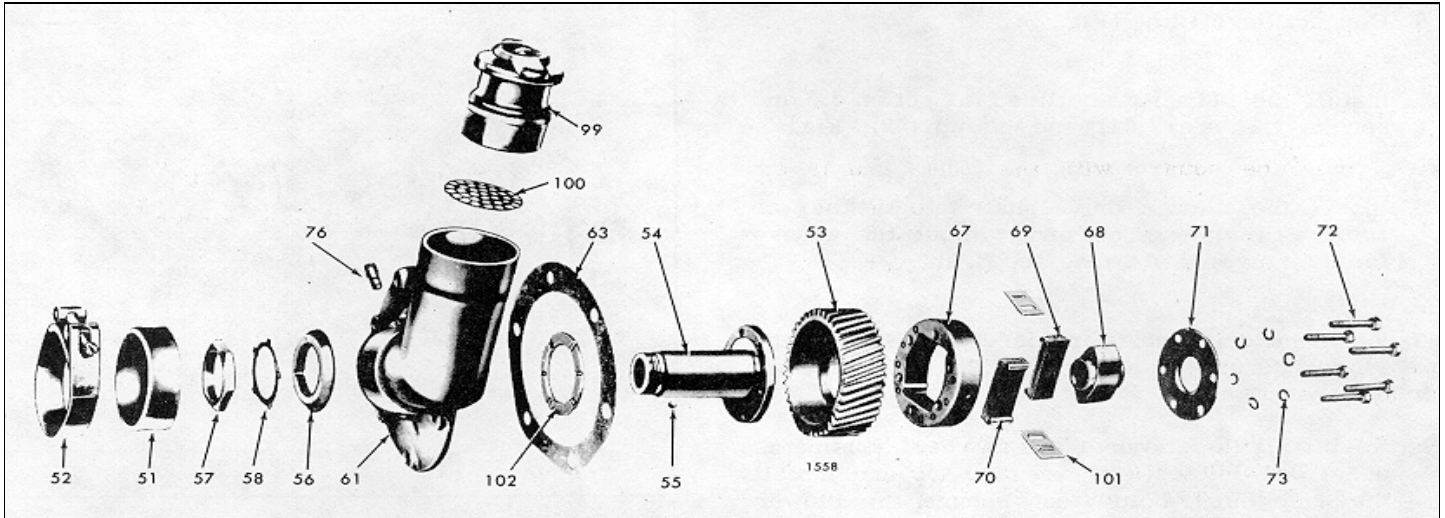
Typical Blower Drive Gear Details and Relative Location of Parts
